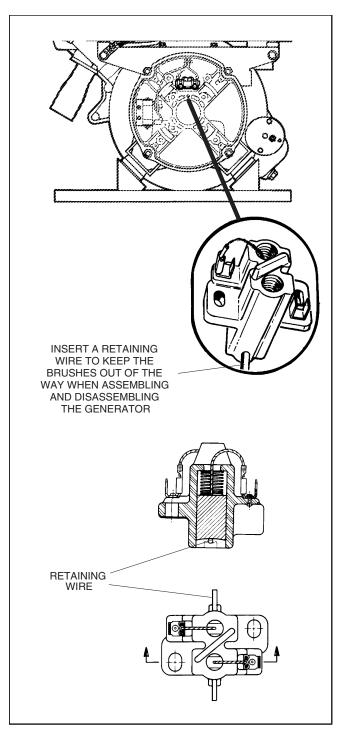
BRUSH BLOCK ASSEMBLY
